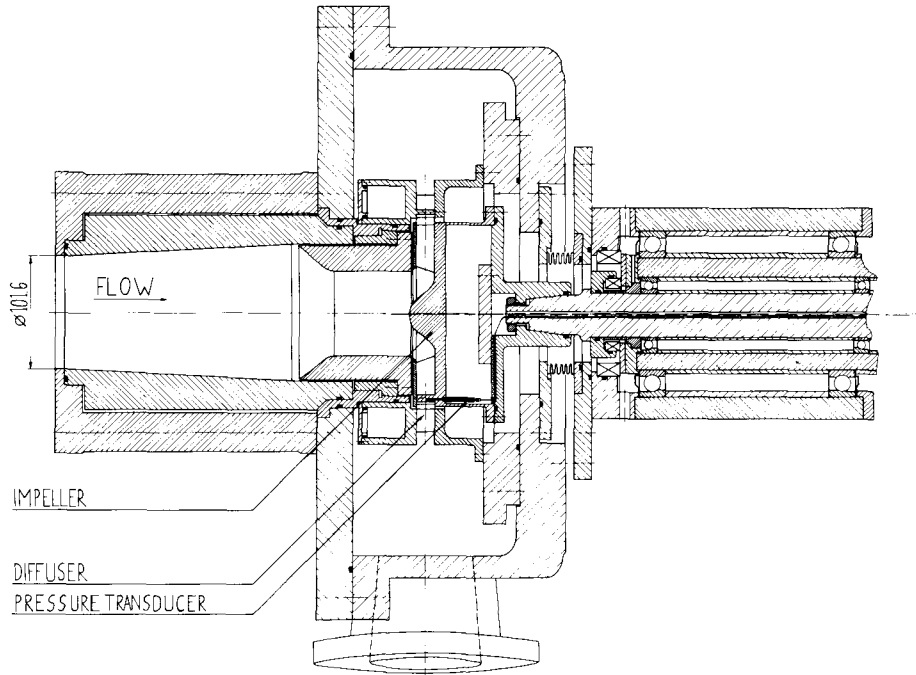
Assembly drawing of the eccentric drive system and the test section with Impeller Z2 installed.
